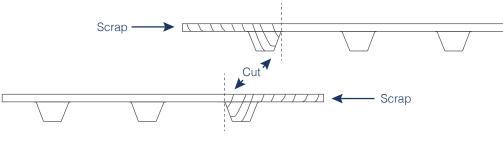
Tooth pattern after joining the SuperDrive™ belt with lace
